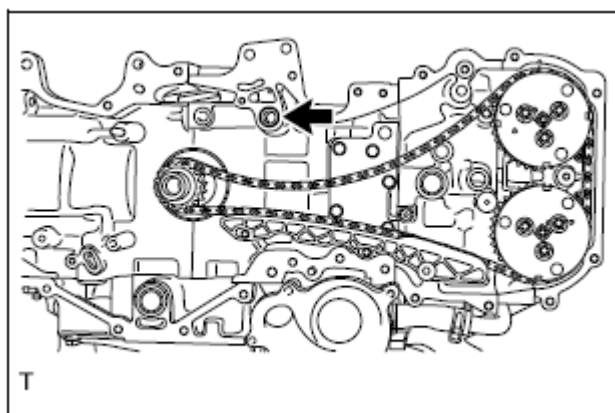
Identifying Cylinder Block O-Ring (Bank 2 Side)
